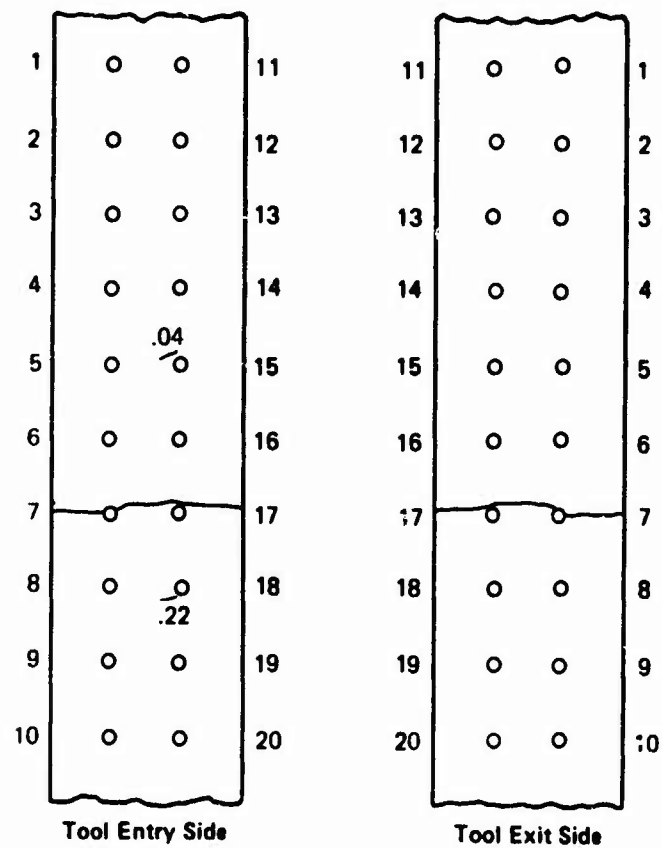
Fatigue Crack Initiation Sites in Usage Simulation Specimen No. 2A20 (Fig. 2, Load Transfer, Type I) Detected During Testing and After Disassembly
